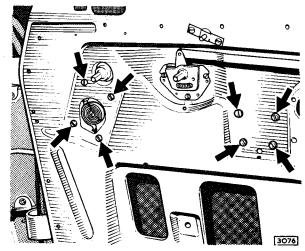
Showing the screws securing the window winding mechanism to the door frame
